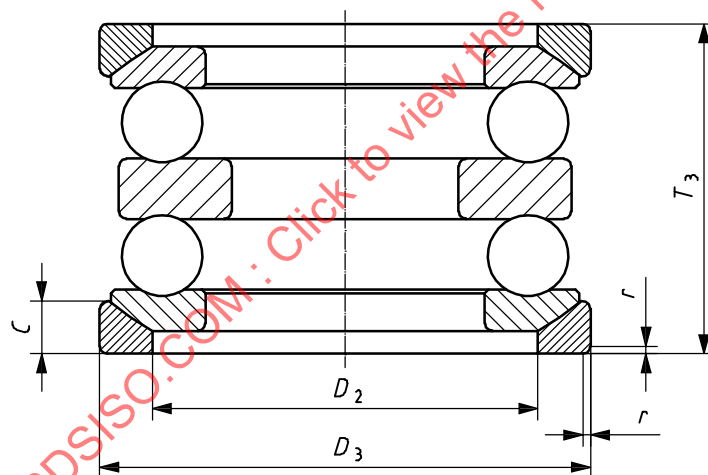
Double-direction aligning thrust ball bearing with aligning seat washers
